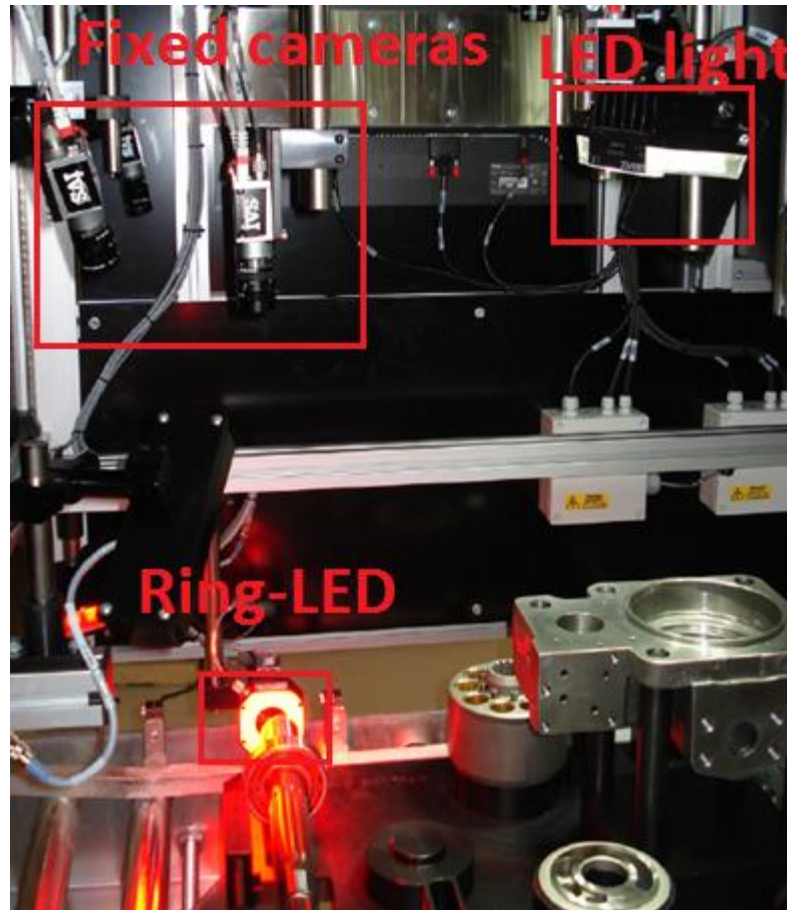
Inspection of axial piston motors. (Industrial Vision Systems Ltd.)
